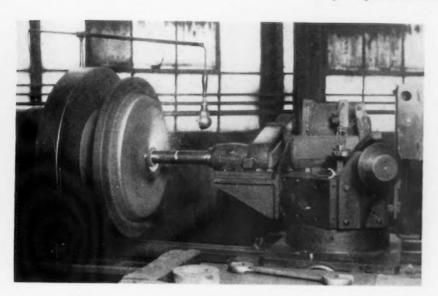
Planetary-type grinder fitted with angle iron locating device and special fixture for grinding the bore of hardened steel cone rollers.
